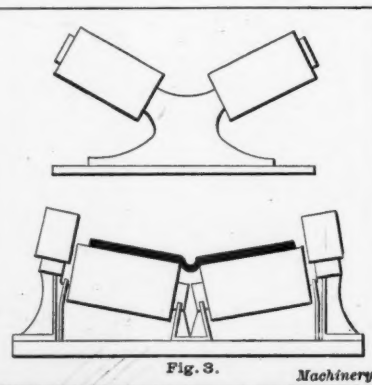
Poor Types of Conveyor Belt Pulleys that cut the Belt instead of allowing it to be destroyed by Ordinary Wear
